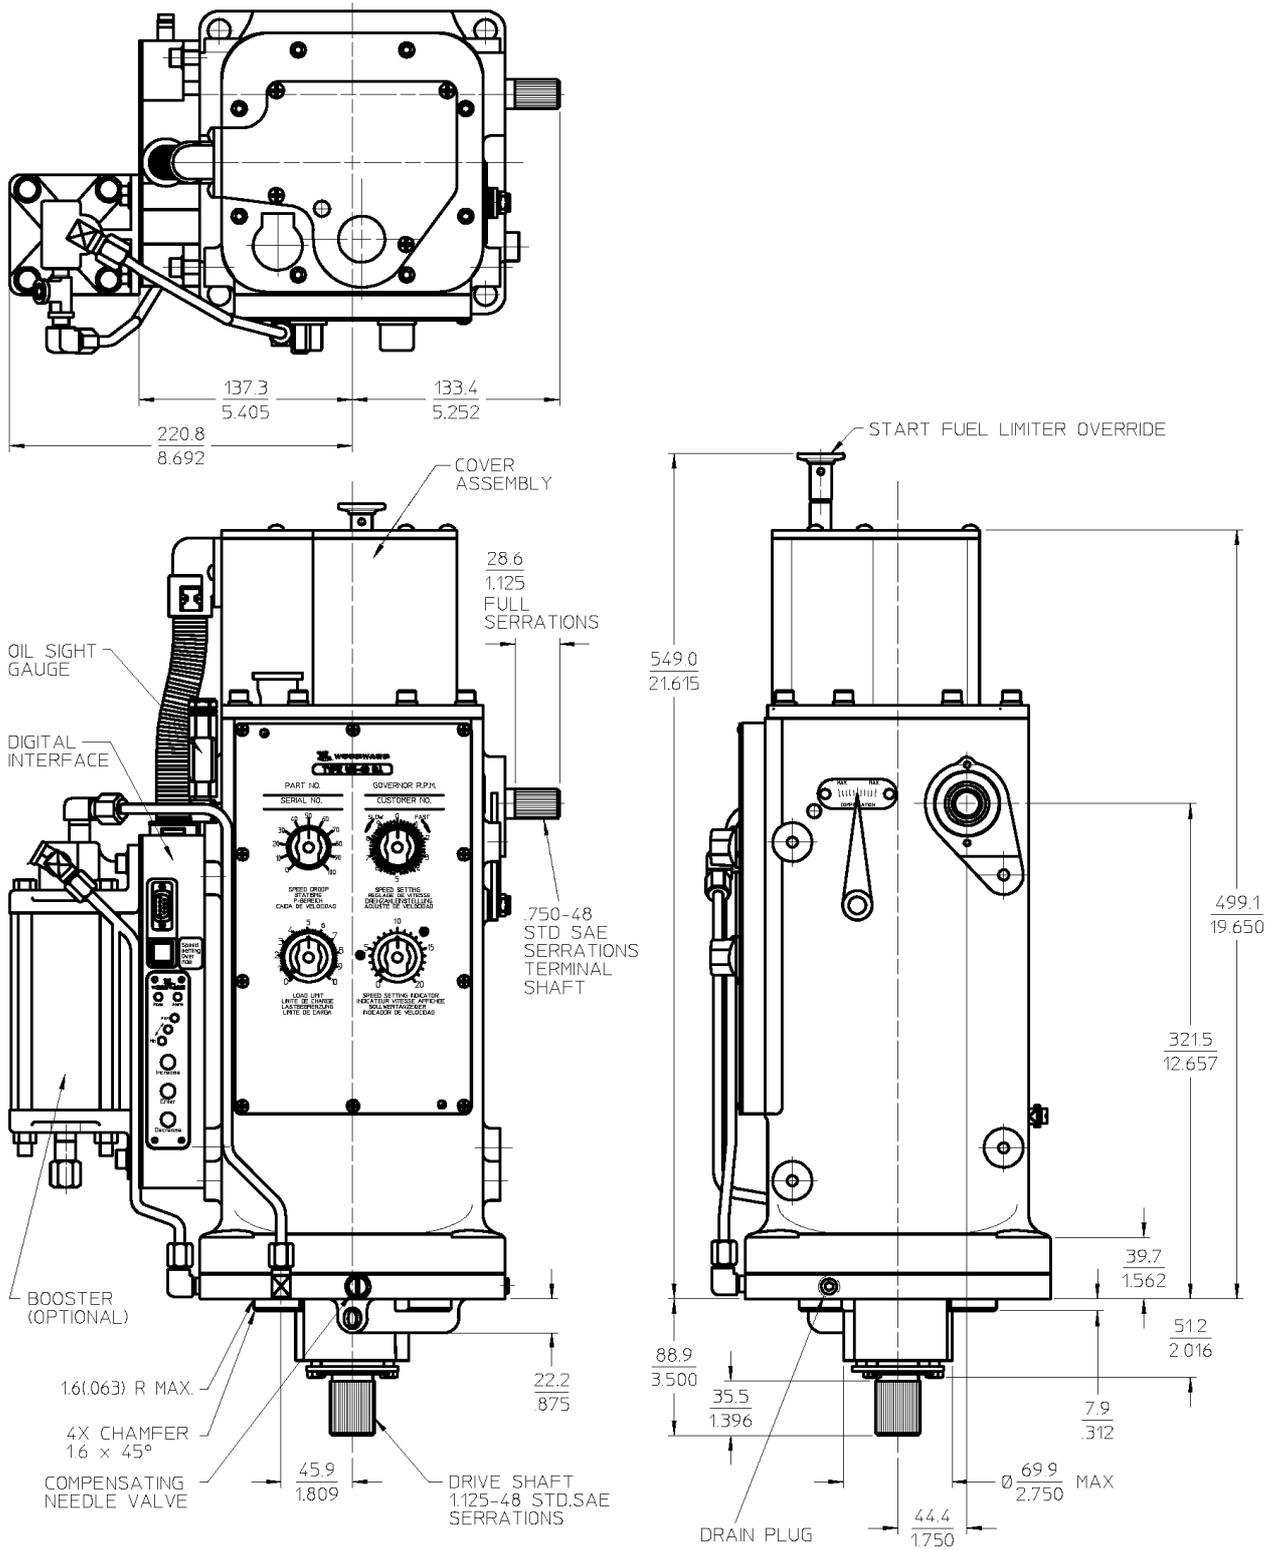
Outline Drawing of UG40-DI Governor (sheet 2 of 2)
